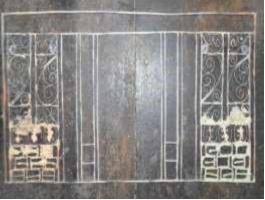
Soldering sankofa filigree Plate 3.71: Frame of main lower body
